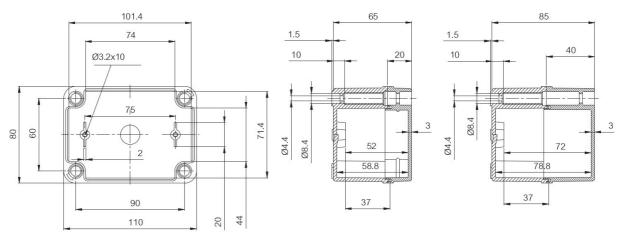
Housing dimensions (in mm). Note: Drawing not including air inlet.
